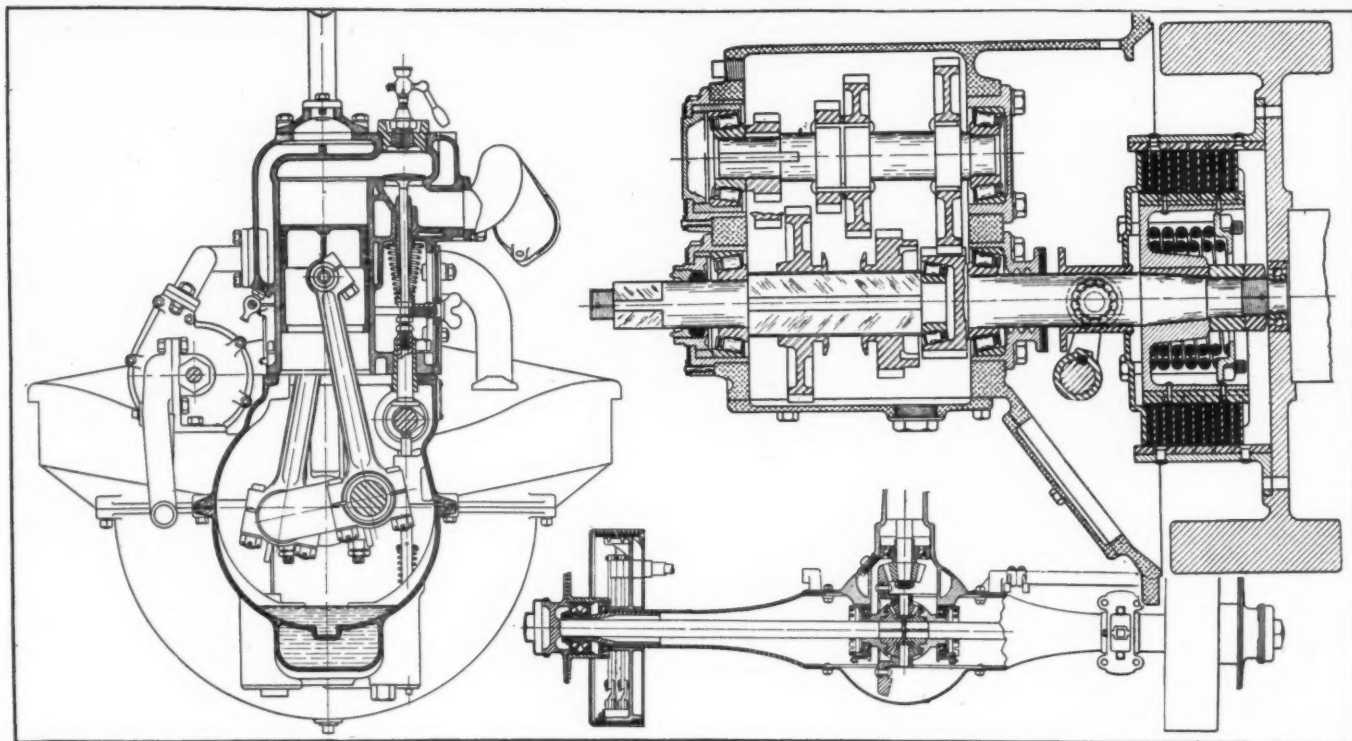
Showing cross-sections through the new Glide motor, clutch, gearset and rear axle
